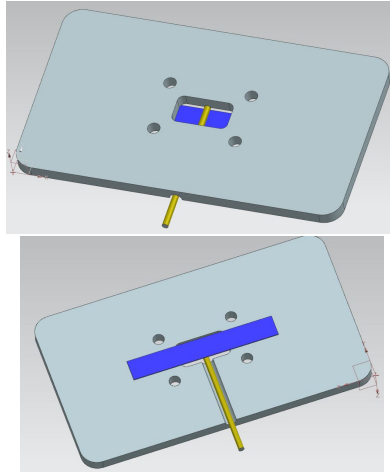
Clamping module used to secure the workpieces in a repeatable manner with a cut-out for the sonotrode, aluminum foil in dark blue and copper wire in yellow: (a) top view (b) bottom view with cut-out for wire
